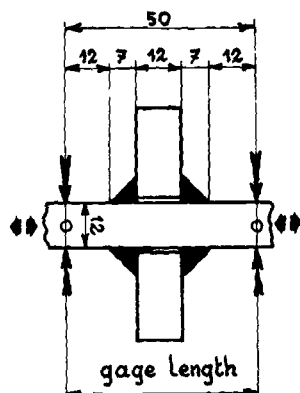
Welded joints—butt joints—submerged arc welding.
